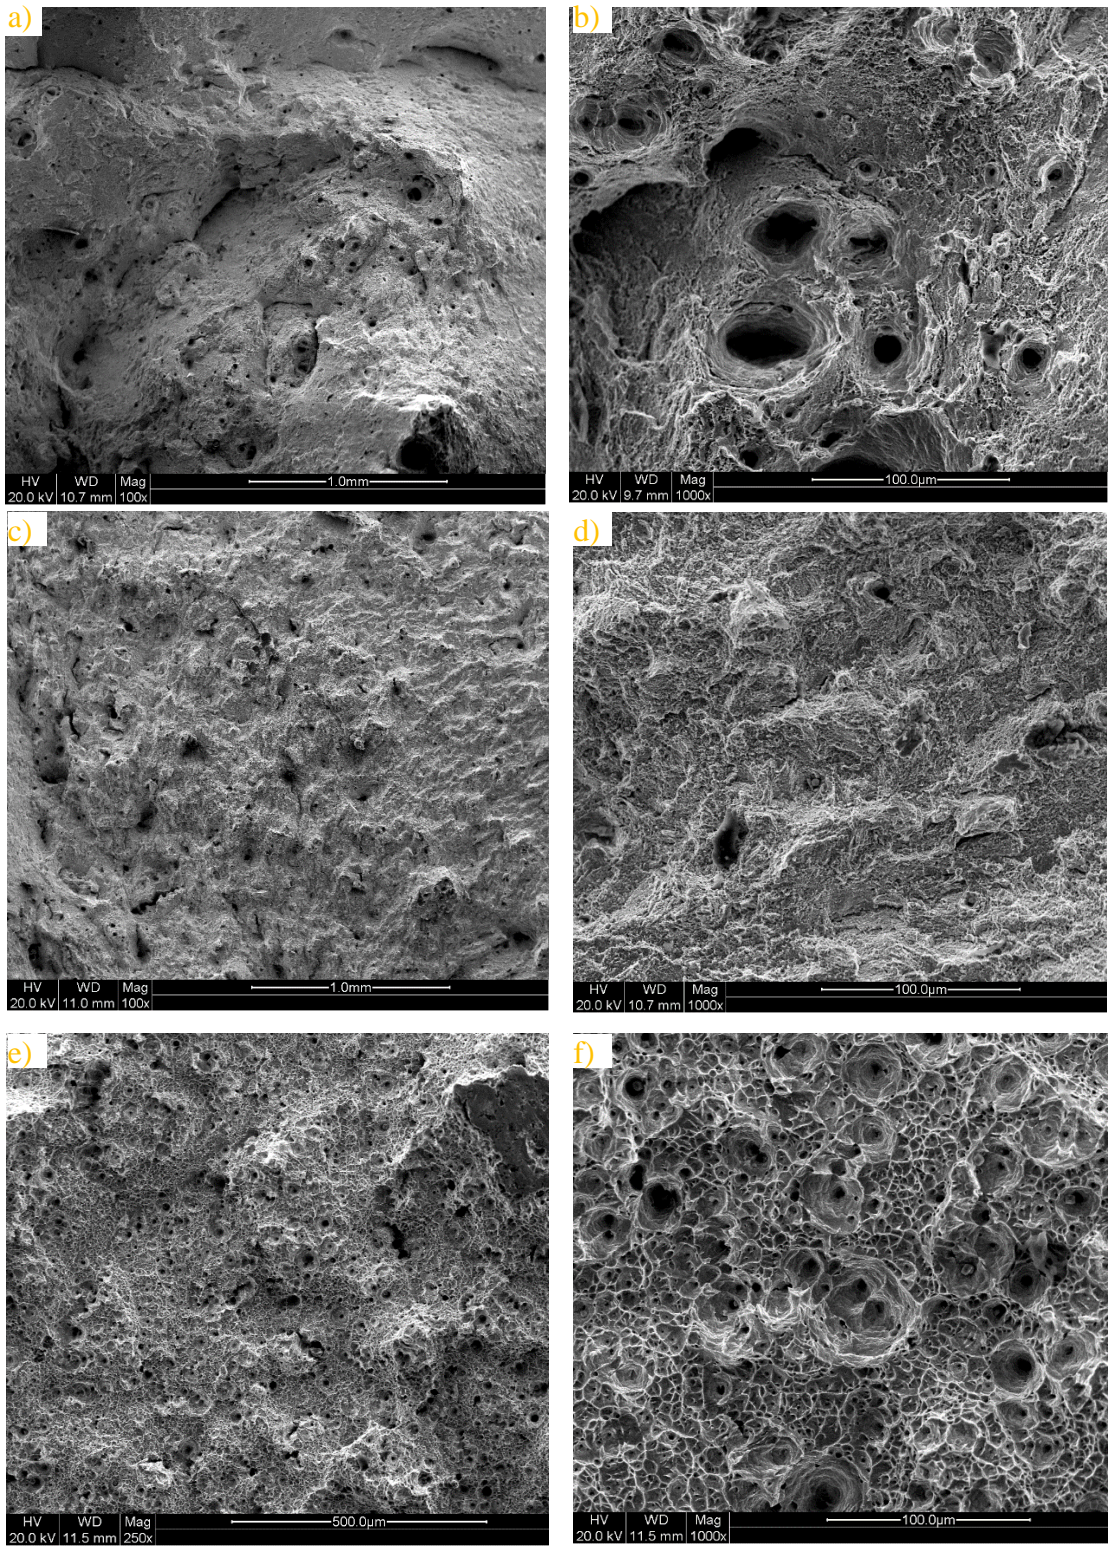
SEM images of the tensile fracture surface for: a&b as built 3d printed samples, c & d heat treated 3D printed samples, e&f CNC machined samples
